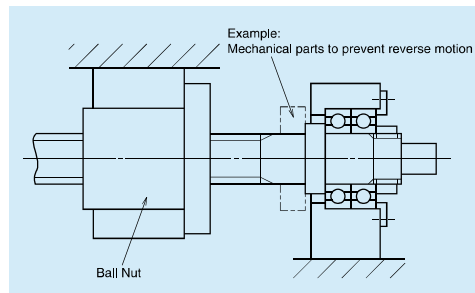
Nut and ball screw are required to be separated when installing in this structure.
